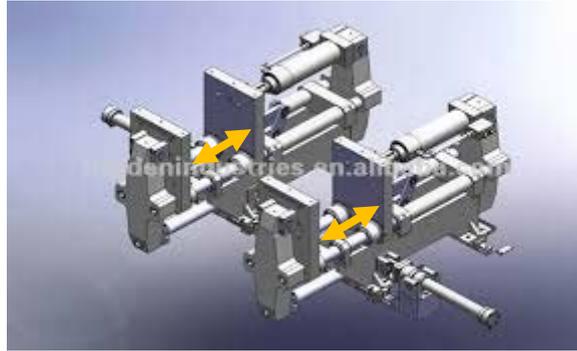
Example of a clamping device in a blow molding machine. (seekpart.com)
